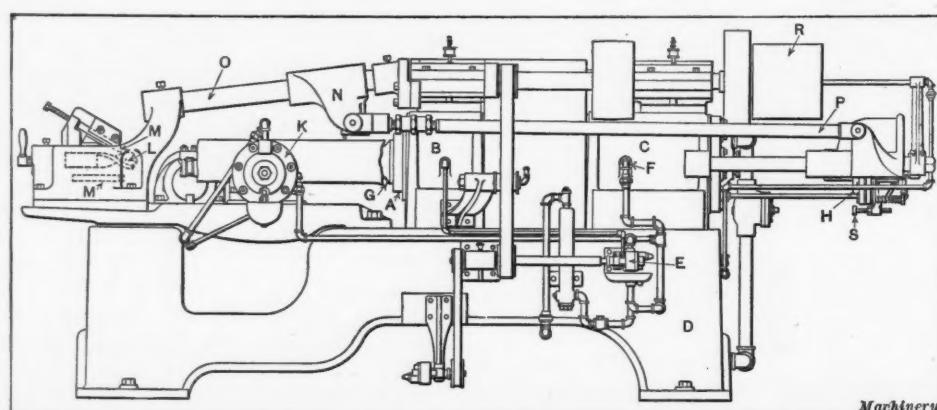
Warren Hydraulic Lathe, showing Drill and End Facing Tools
